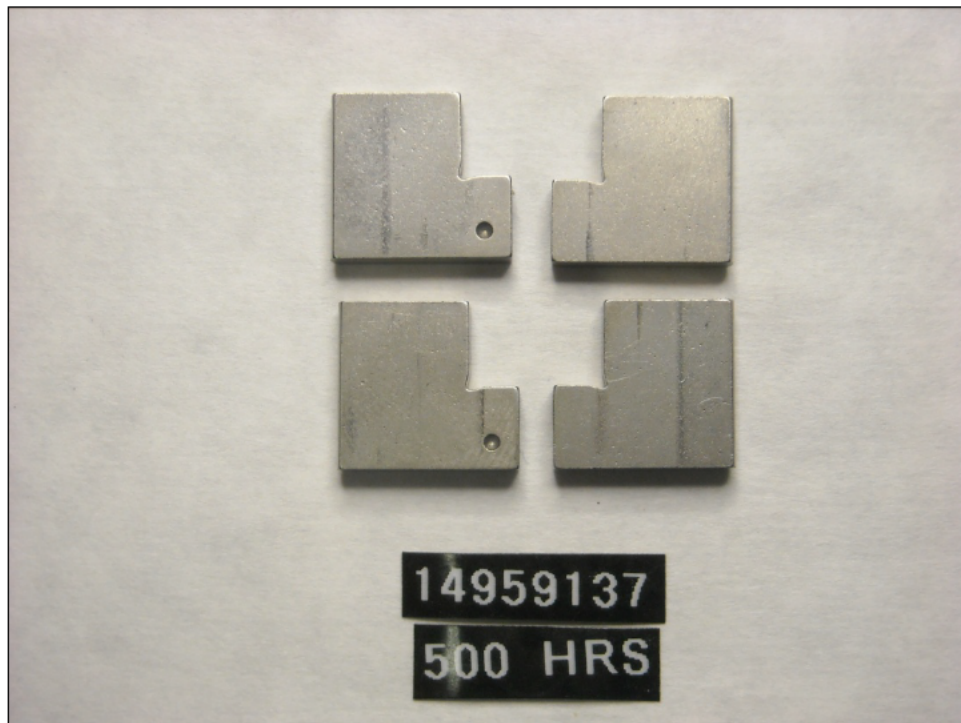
SN14959137 Transfer Pump Blades (Side), After
